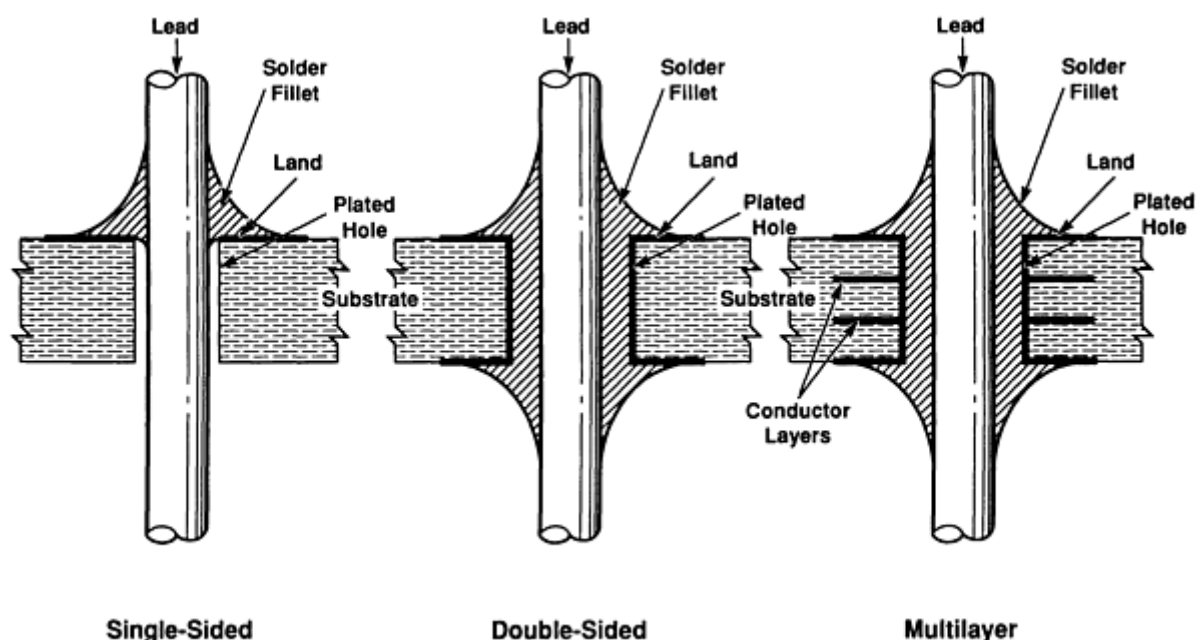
SINGLE-SIDED, DOUBLE-SIDED, AND MULTILAYER SOLDER JOINT CONFIGURATIONS FOR THROUGH-HOLE TECHNOLOGY
